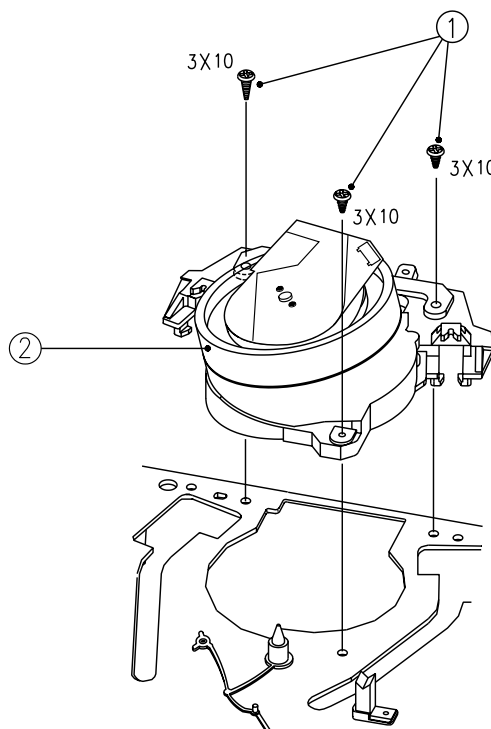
DRUM TOTAL ASS'Y & EARTH BRKT ASS'Y REMOVAL
